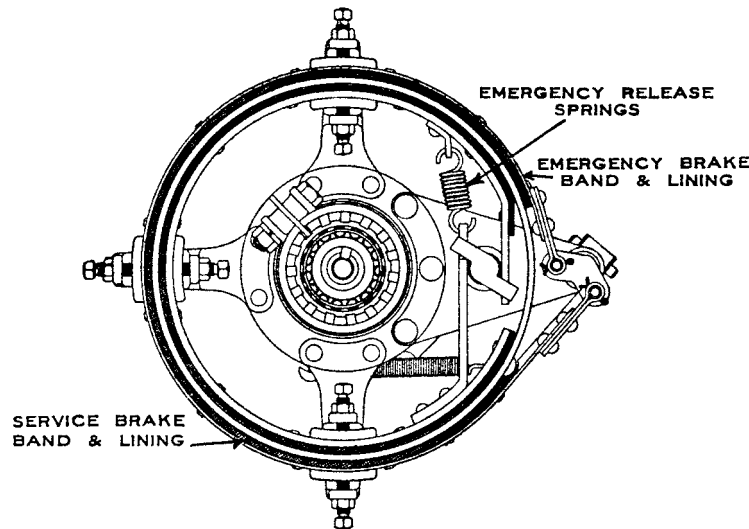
A—Two Wheel Band Type Brake (Split Type Housing—10" Brakes)
